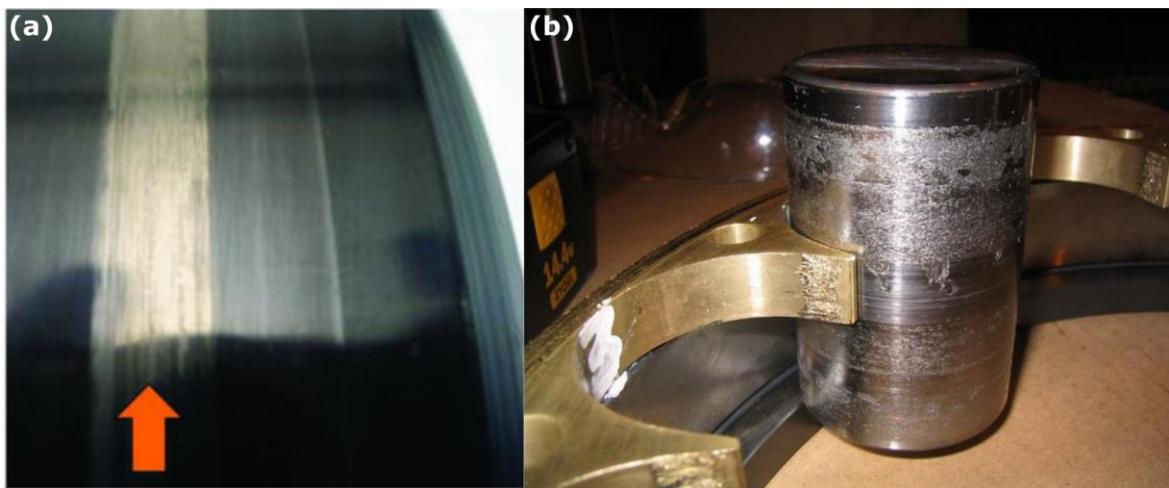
(a) Smearing on a bearing inner raceway [90] and (b) a roller [91]
